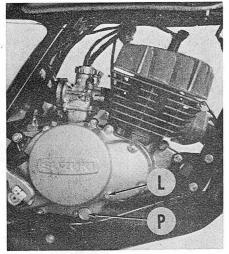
Transmission lubricant should be maintained at level of plug (L). Remove plug (P) to drain gearbox.
